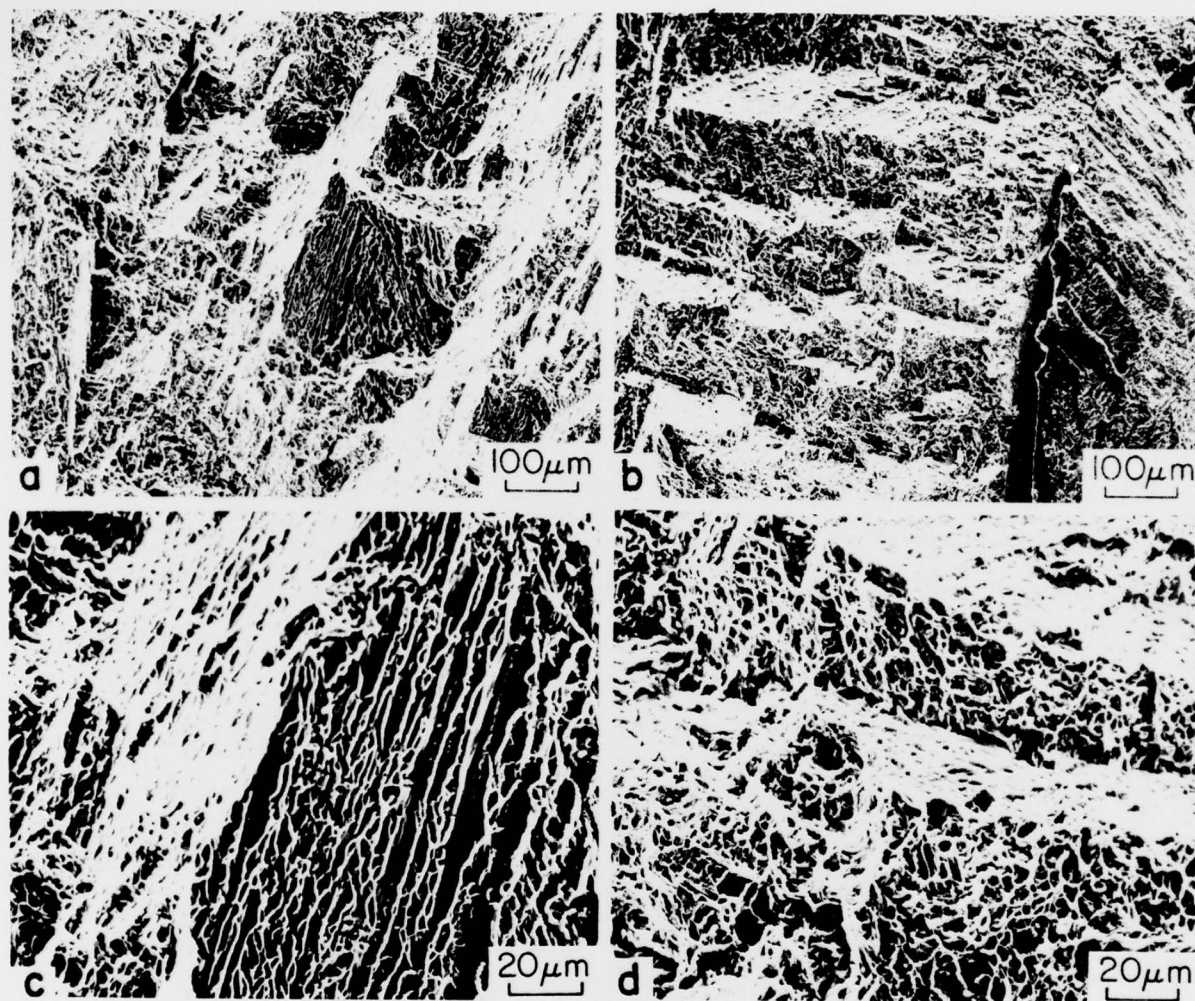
Fracture surface of Condition 5  $K_{IC}$  specimen: (a,c) fatigue precrack to rapid fracture transition; (b,d) rapid fracture.
